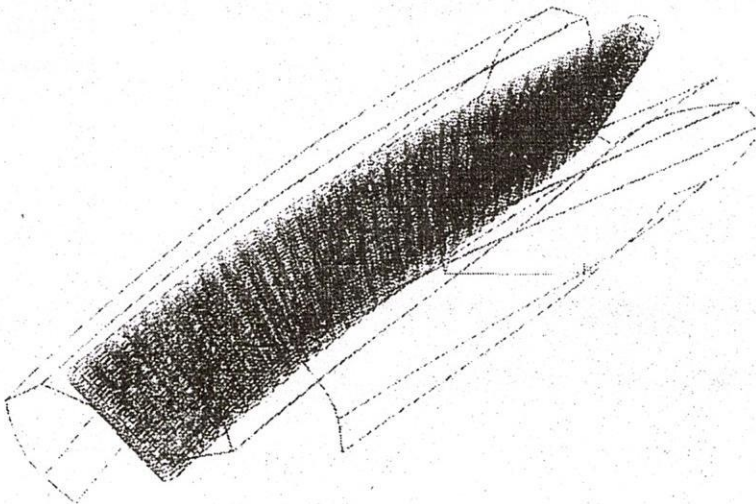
Tool path to machine the first artificial surface in Unigraphics II
